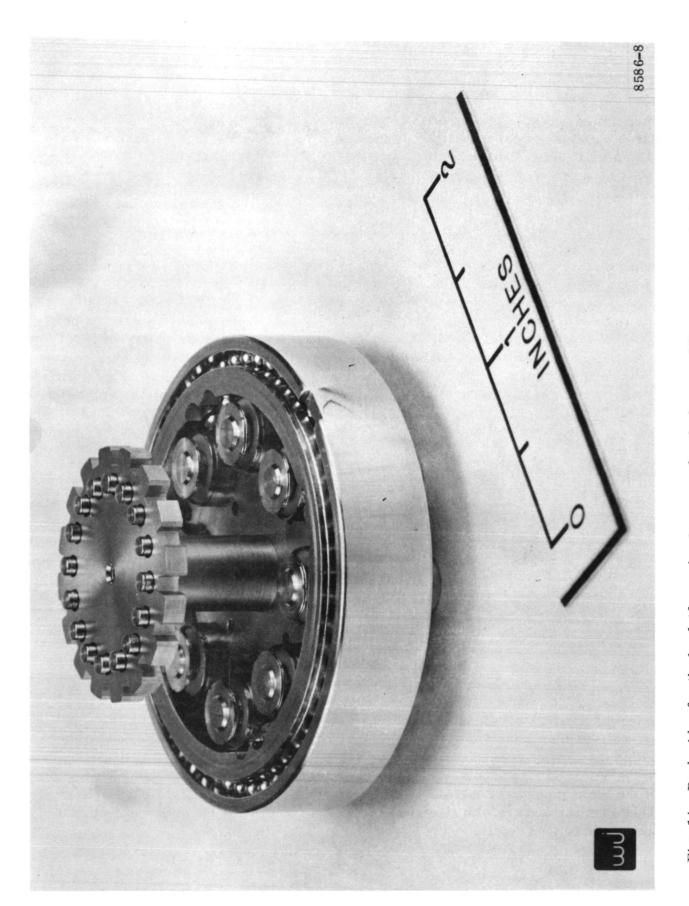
Back side of cathode platform showing rear of cathode assemblies. Driving platform with driving pins and locking arm engagement slots is located on pedestal.
